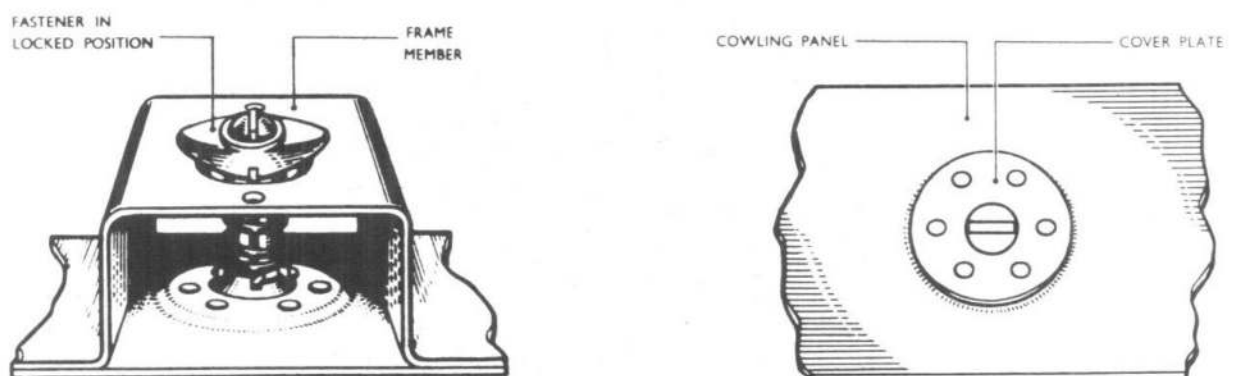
Fastener, Type 2 mounted on the front of the cowling
